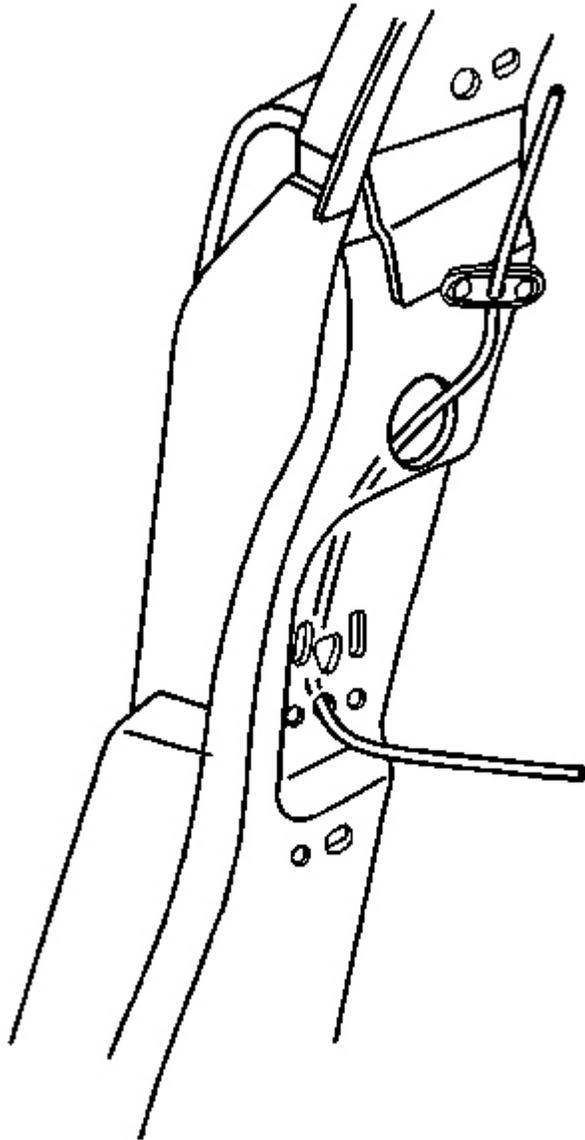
Inserting Stiff Wire Through Drilled Out Hole & Through Anchor Plate Hole
